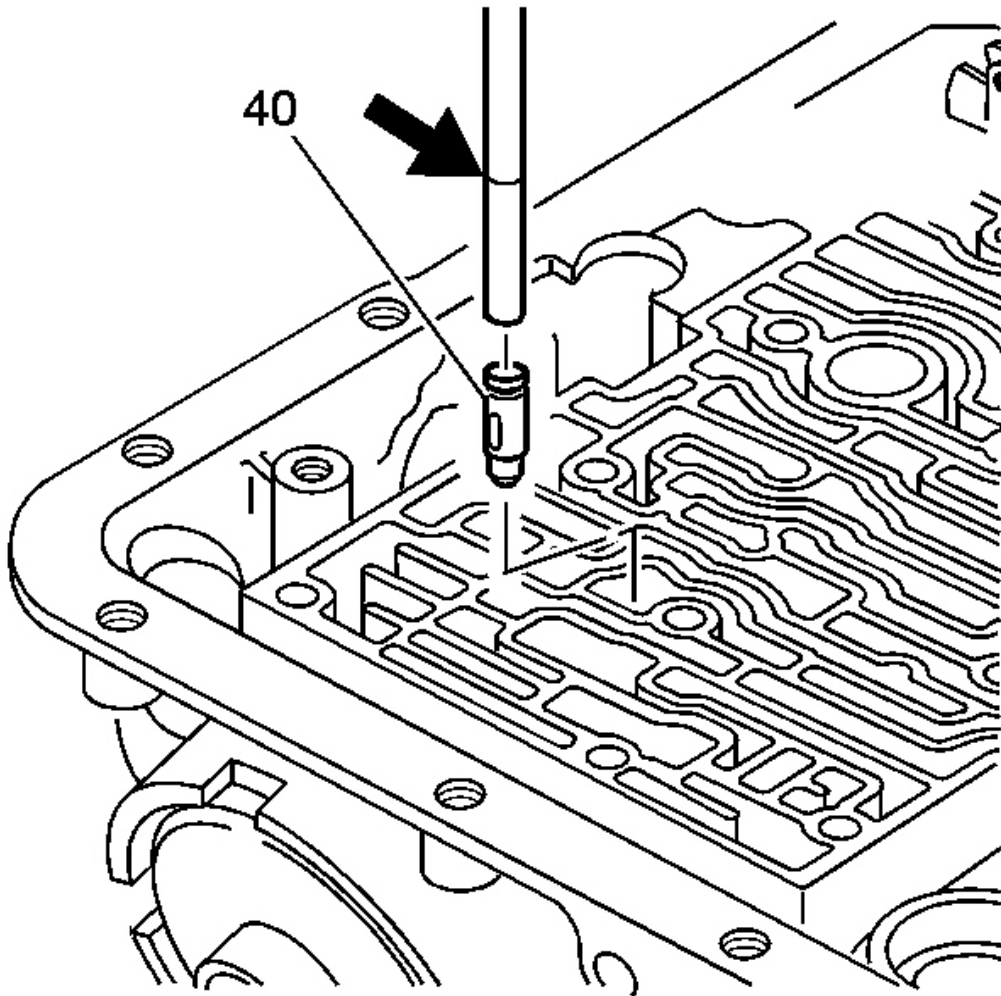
Installing Third Accumulator Retainer And Ball Assembly
